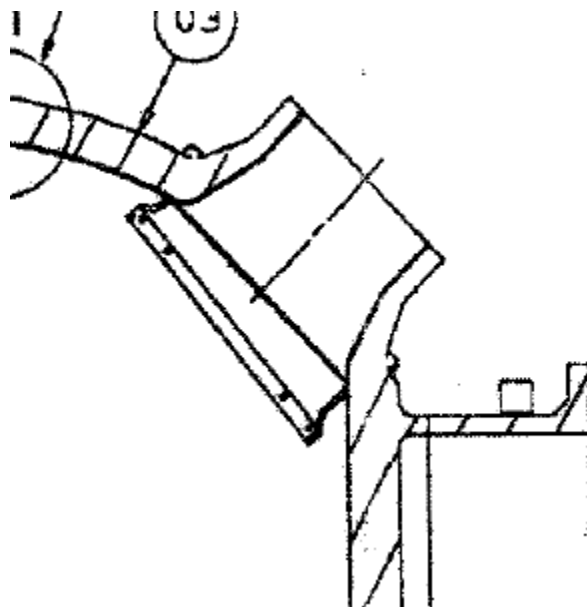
ANO-2 Item No. B3.130 Weld Configuration [2-6]
